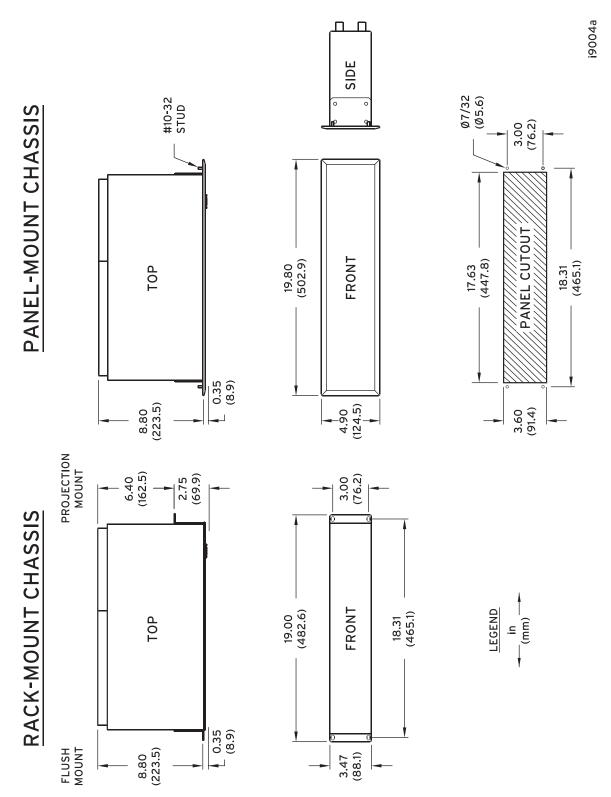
SEL-2100 Dimensions and Panel-Mount Cutout
